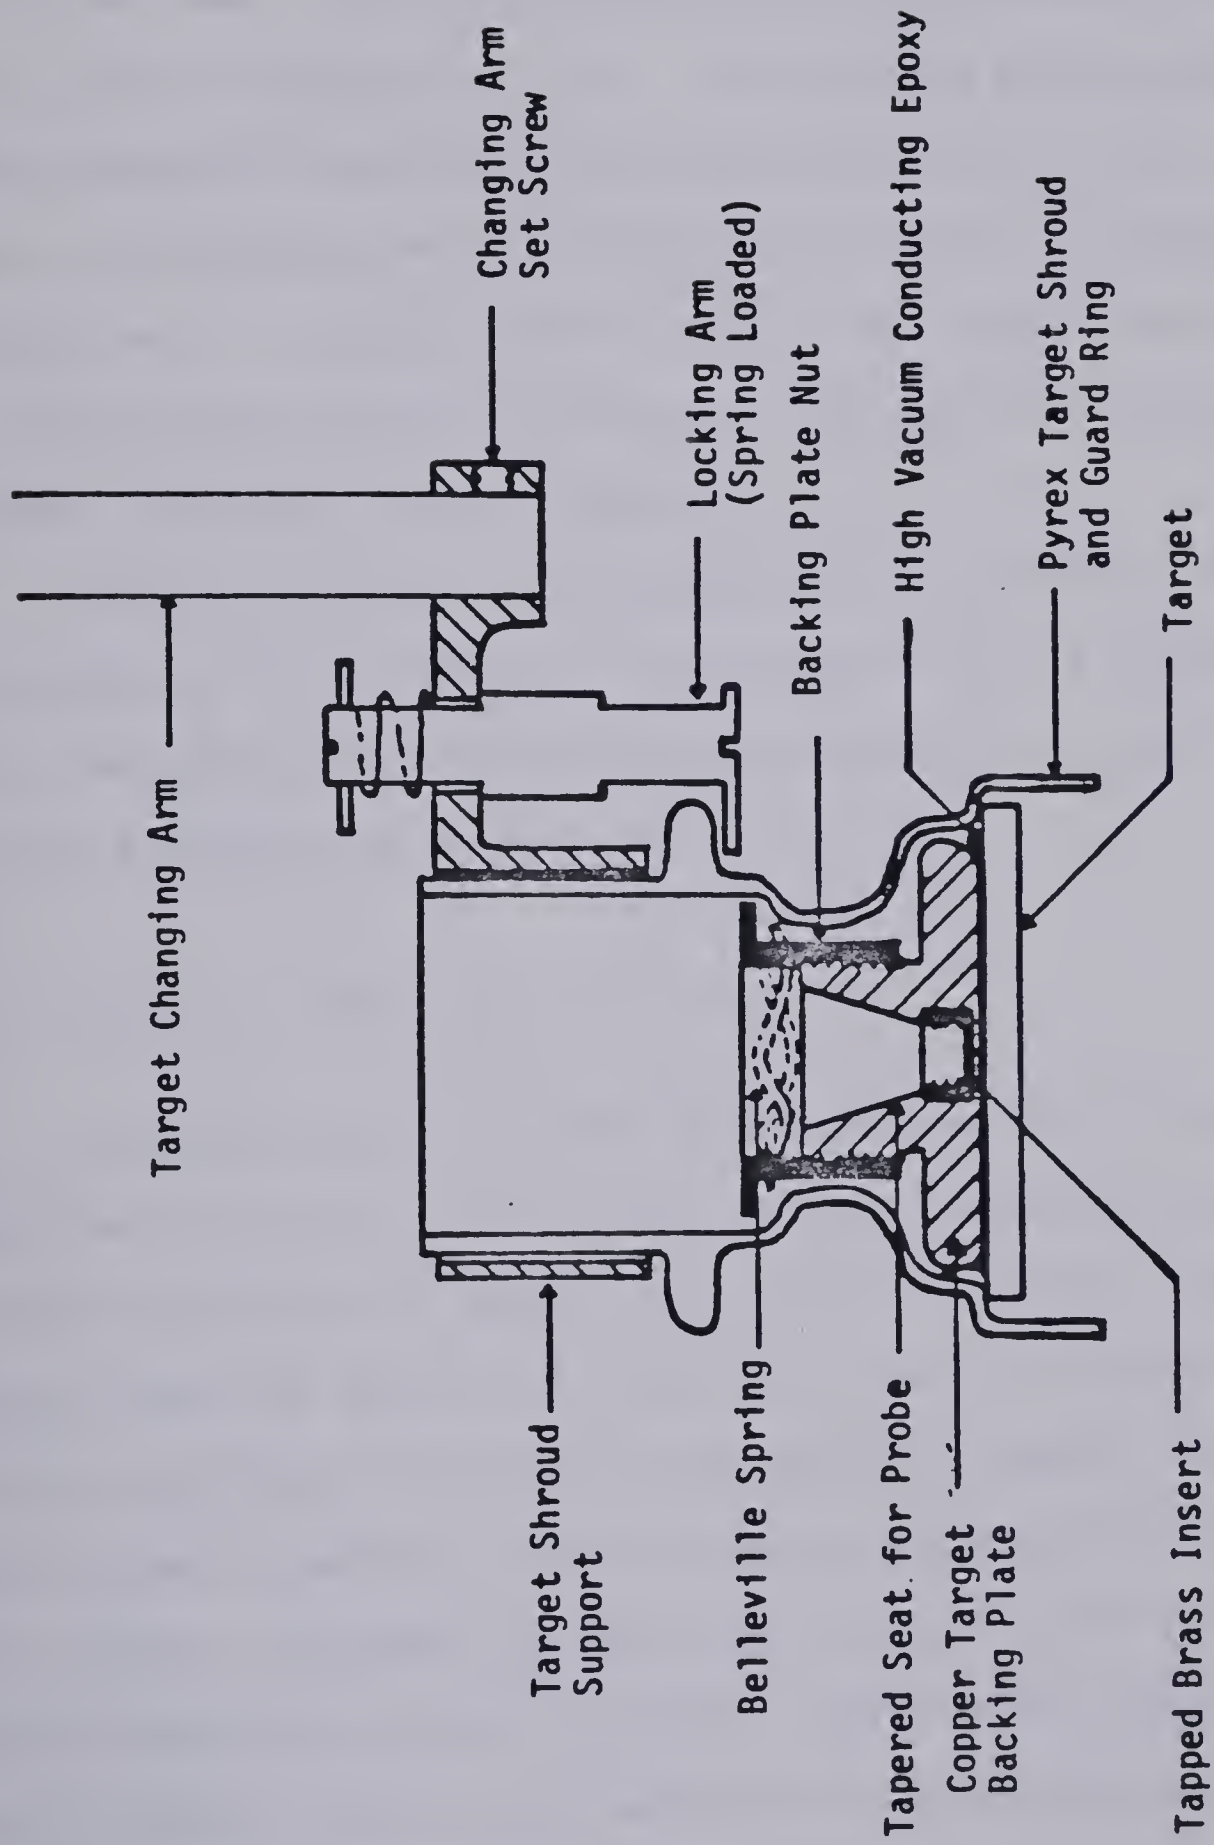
Cross Section of the Target Changing Arm Assembly.
